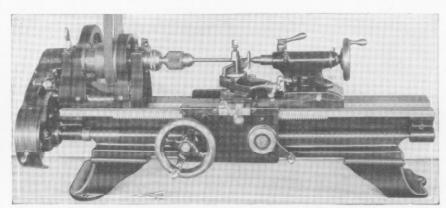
Refacing a Valve with Stem Held in Chuck and Valve Head on Center
